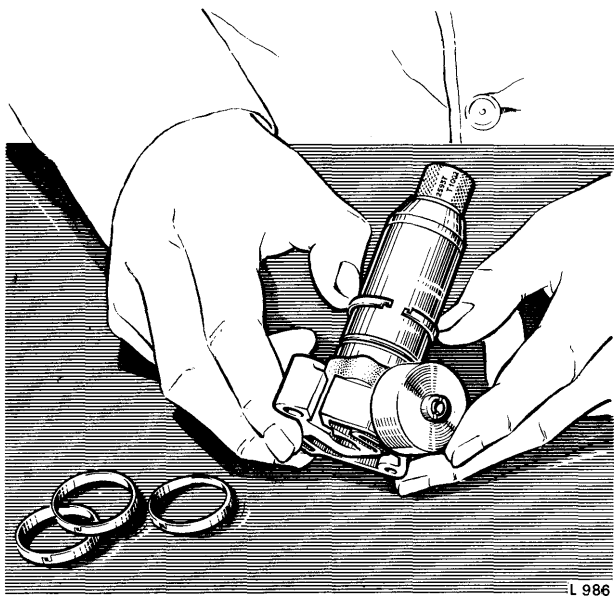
FITTING THE GOVERNOR OIL SEALING RINGS
